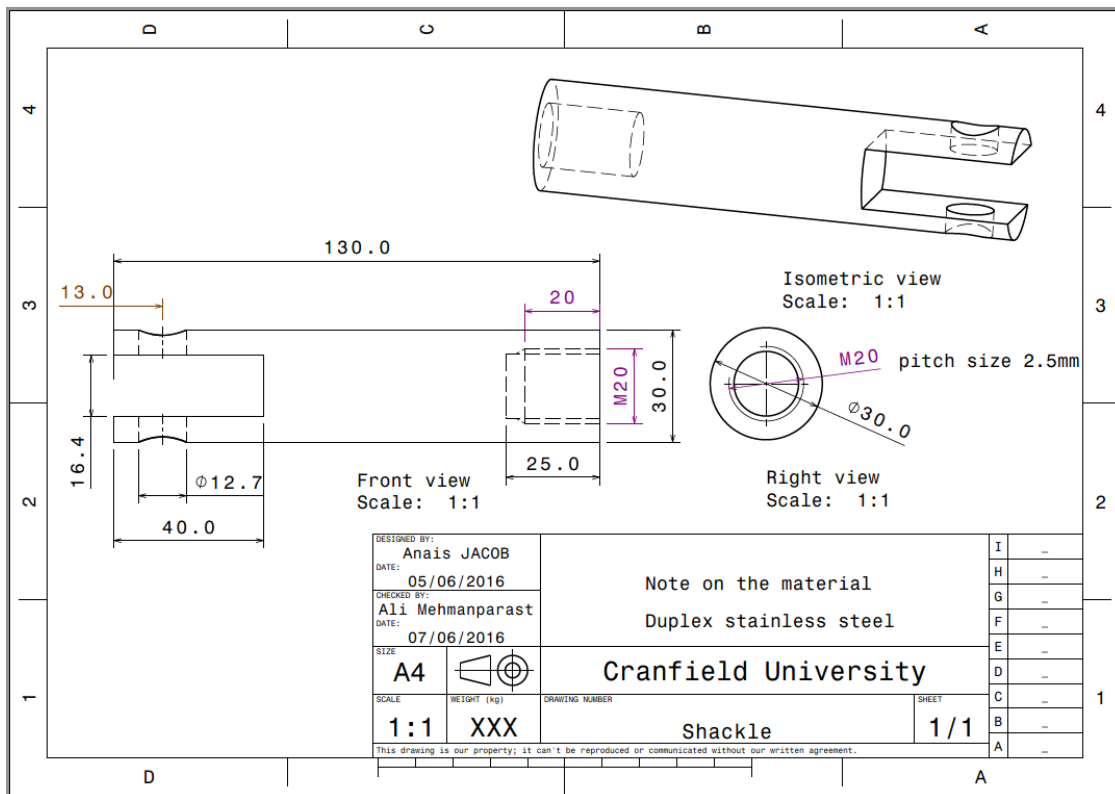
Technical drawing of the shackles manufactured for the FCG tests
